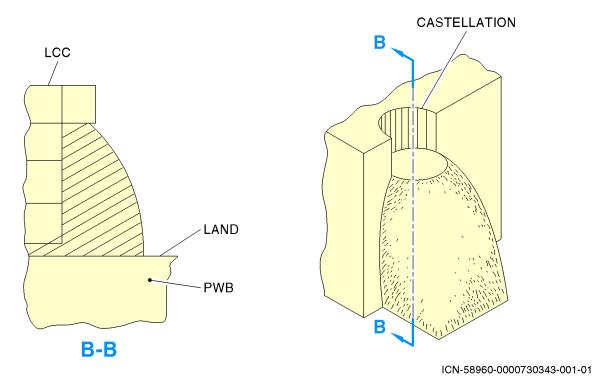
Maximum Allowable SMT LCC Solder Joint
